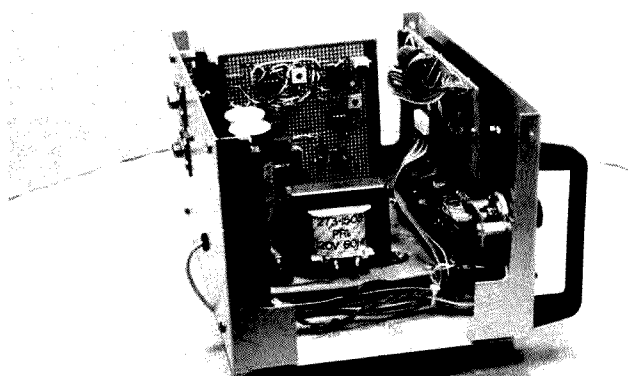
Photo H. A receiver filter using a combination of mounting methods: horizontal for the power supply, front-panel mount for a counter/readout circuit, and PC-board sockets for signal-processing circuits.
